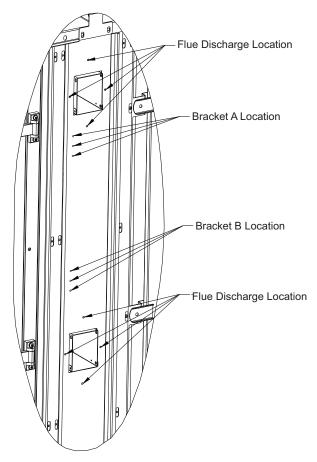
Flue Discharge Deflector Mounting Position — High Heat (Detail View) MAINTENANCE
